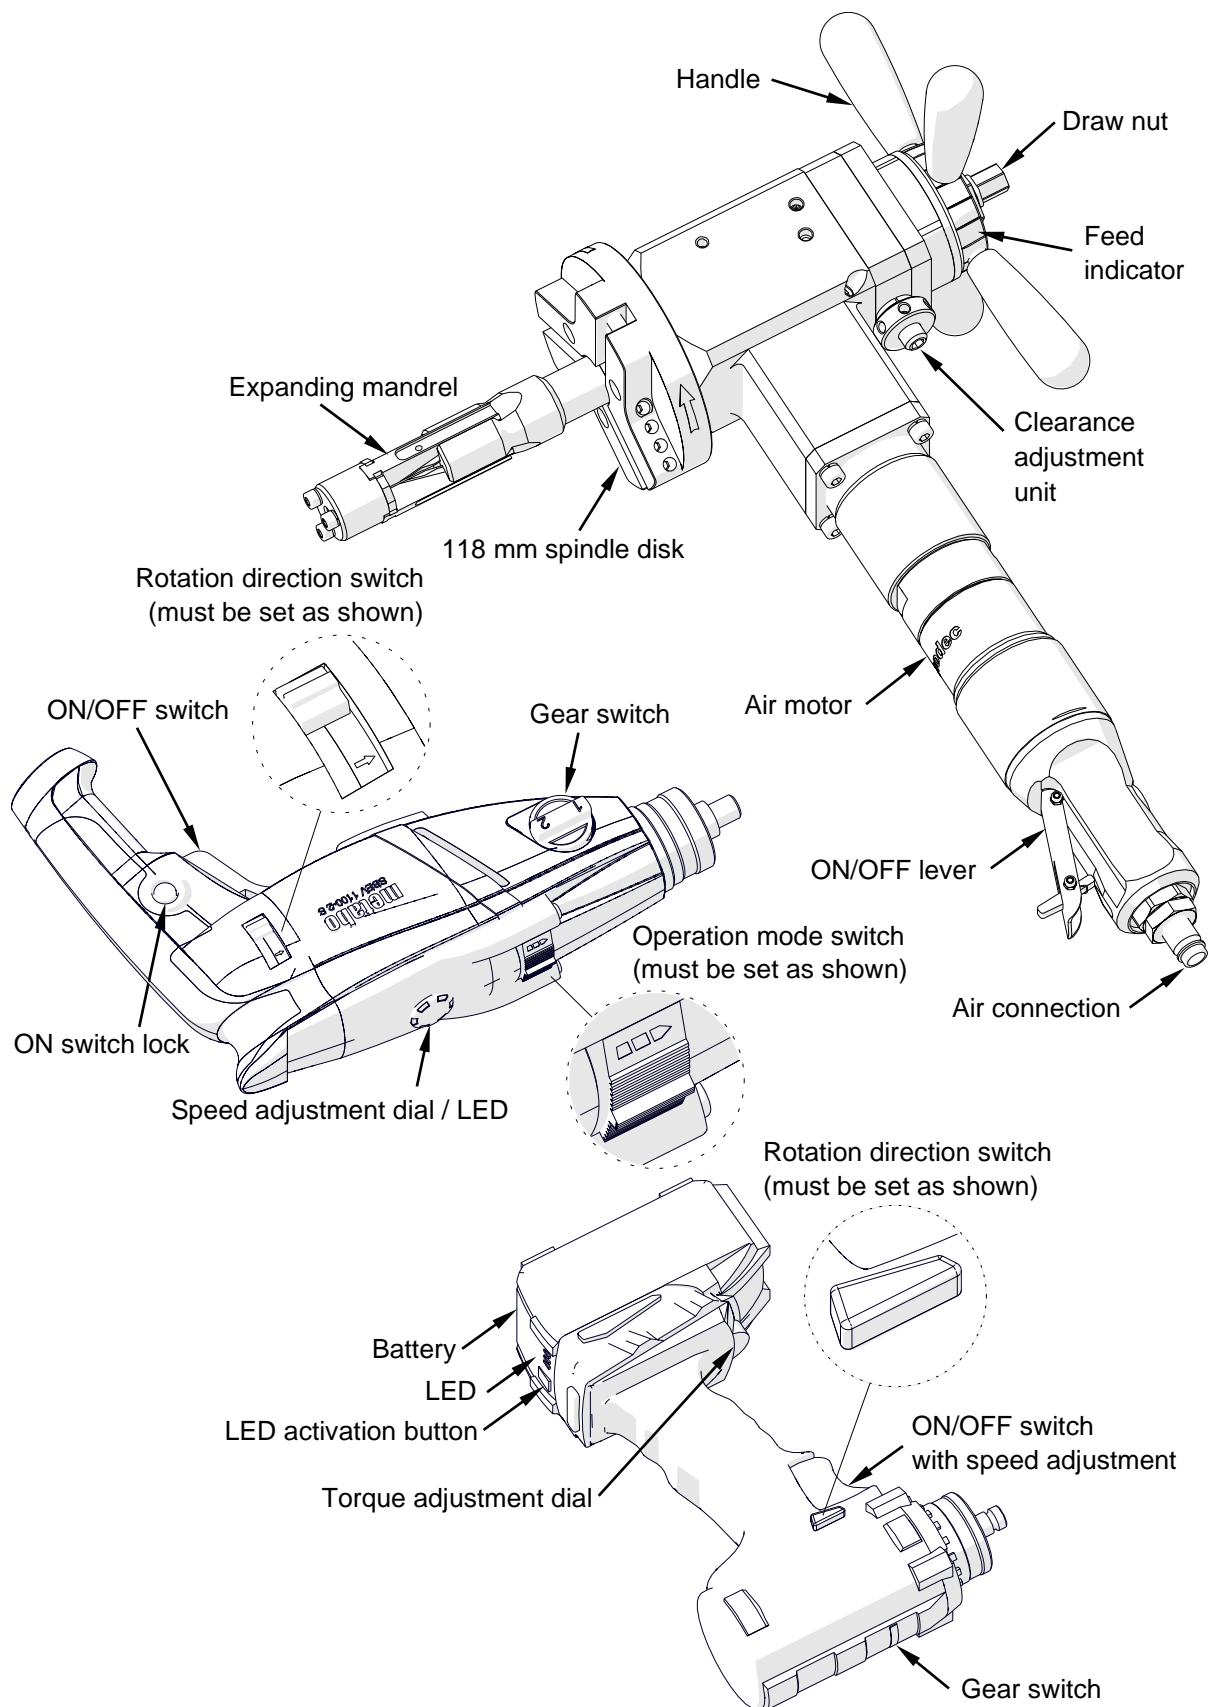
View of PB-5 and of PBE-5 electric motor and PBC-5 battery motor
